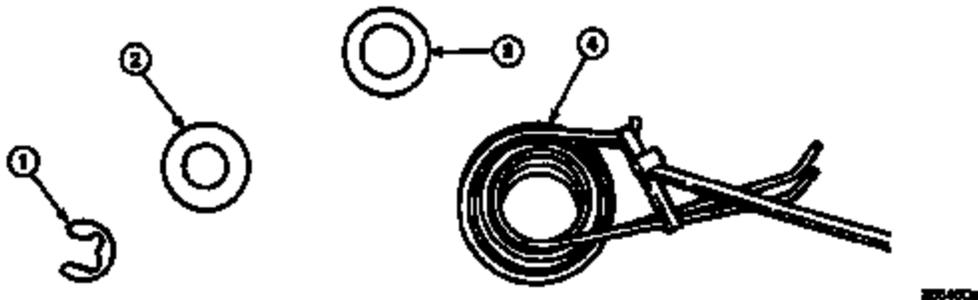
34RC2129M Spring Pack Replacement Kit
